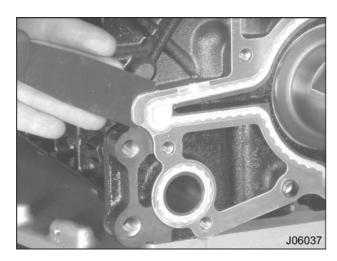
Cutting sealant between front cover gasket and upper / lower crankcase joint (condition 2)
